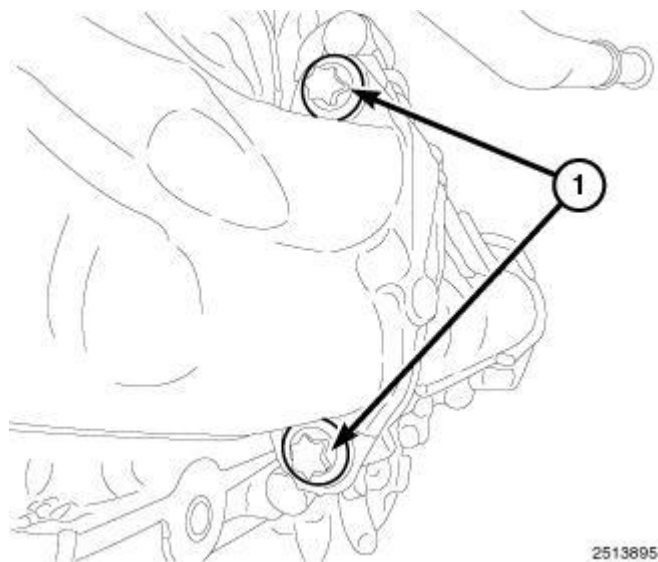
Cylinder Head Rear Cover-To-EGR Gasket
